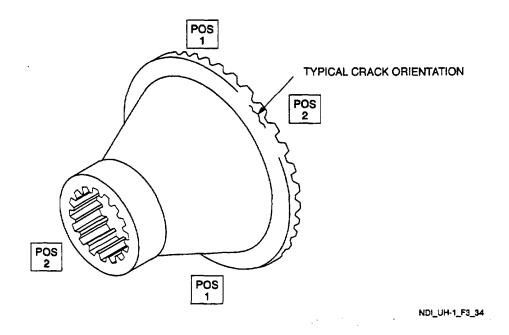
Tail Rotor Driveshaft Rear Coupling
